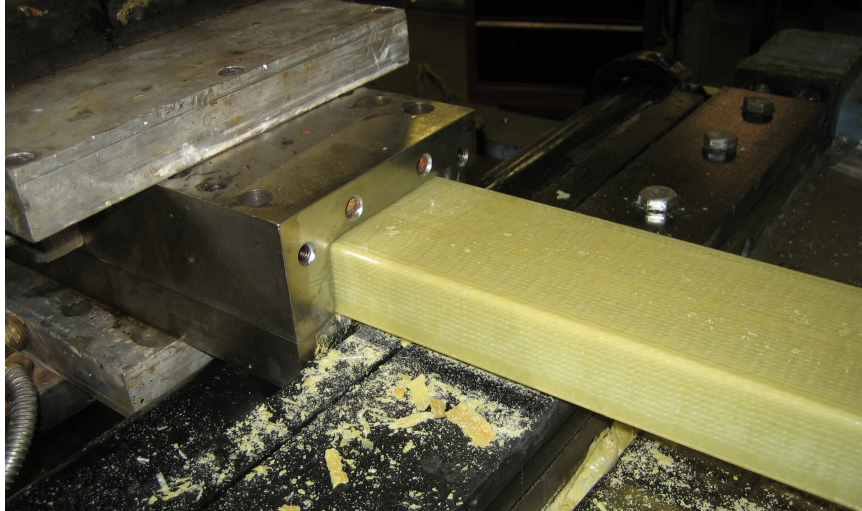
Photograph showing completed hybrid co-pultruded specimen emerging from the pultrusion die. Note the pultrusion die and heater plates visible on the left side of this photograph.
